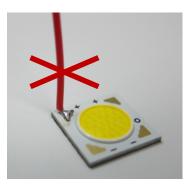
Example of problematic wire bending that induces stress on the solder joint
